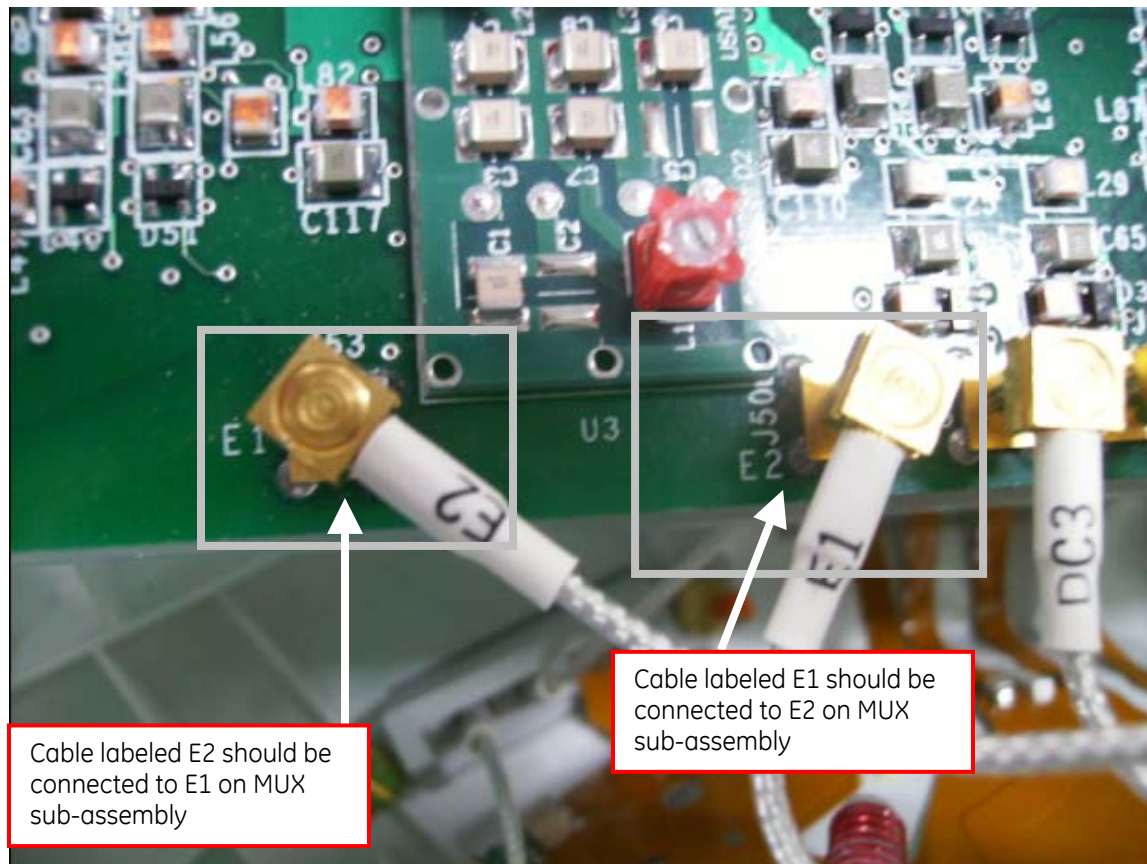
The cable labeled E2 should be connected to E1 on MUX sub-assembly, and the cable labeled E1 should be connected to E2 on MUX sub-assembly
